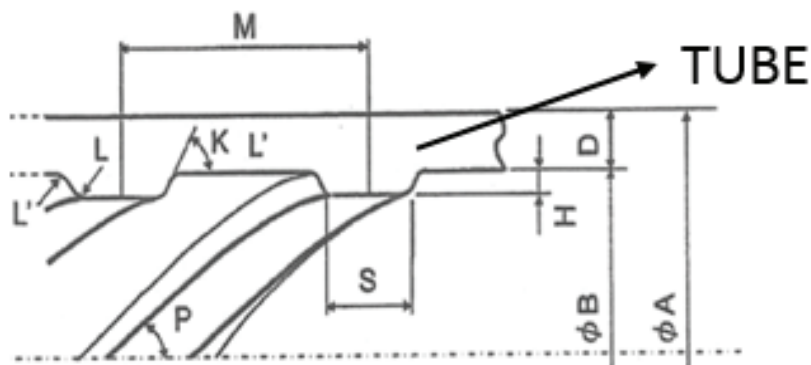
Relevant dimensions of multi-ripped tube - longitudinal section
